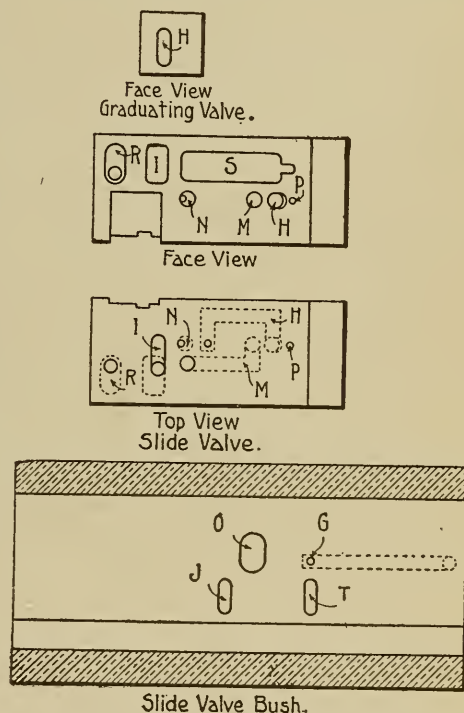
Views of Graduating Valve, Slide-Valve, and Slide-Valve Bush of "K-2" Triple valve.
